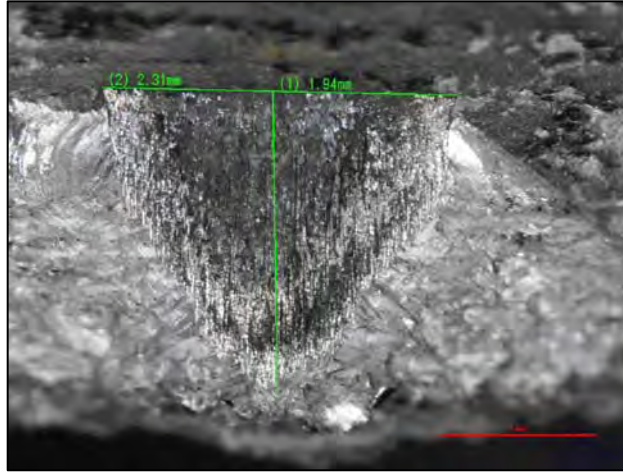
Image of exposed “thumbnail notch” produced by laser machining in aluminum test specimen.
